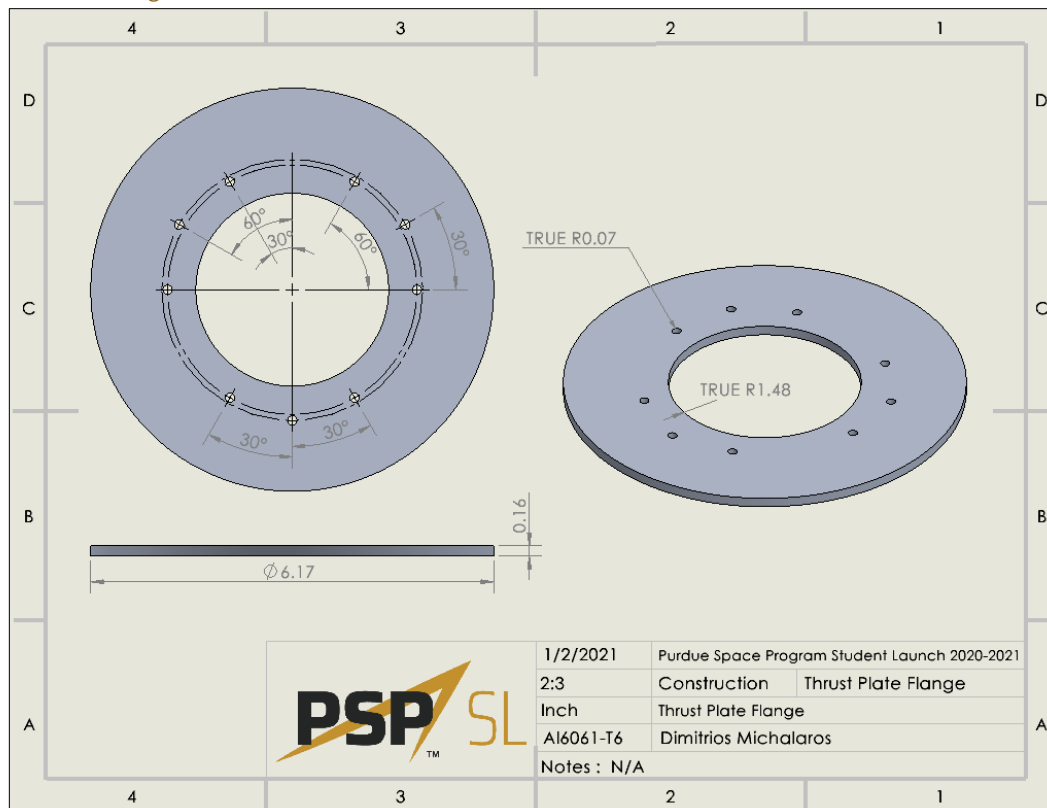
Thrust Plate Flange Dimensional Drawing
